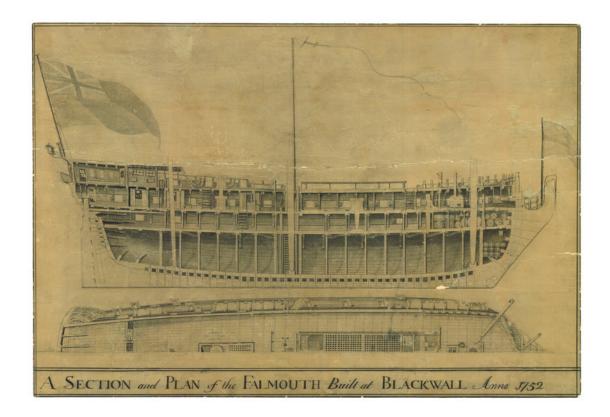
"A plan showing the inboard profile with details, and half plan of the upper deck and fittings of the Blackwall built merchant ship Falmouth-1752" (*National Maritime Museum*)
